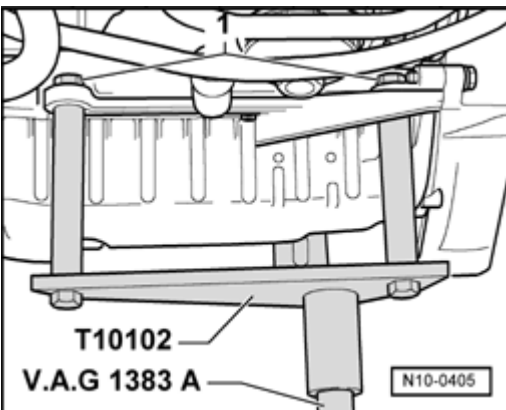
Identifying Engine/Transmission Support T10102 And Engine/Transmission Jack V.A.G 1383 A
